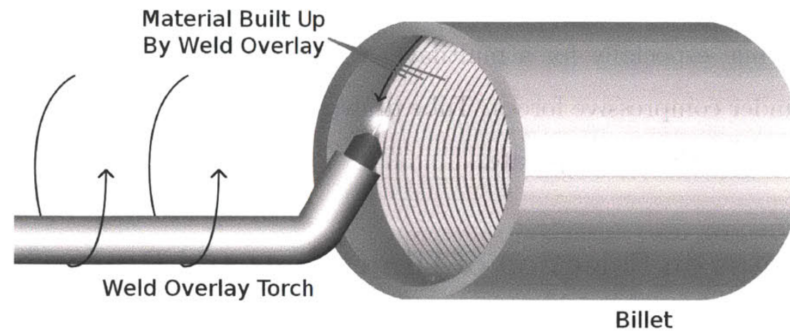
Schematic illustration of weld overlaying the inner surface of an extrusion billet: the welding torch rotates inside the bore, or the billet rotates around the torch, while the torch is slowly retracted. A spiral overlapping weld bead is deposited. Multiple passes can be made to build up a thicker coating. This process is equally applicable to weld overlaying the outer surface of an extrusion billet. [55]
